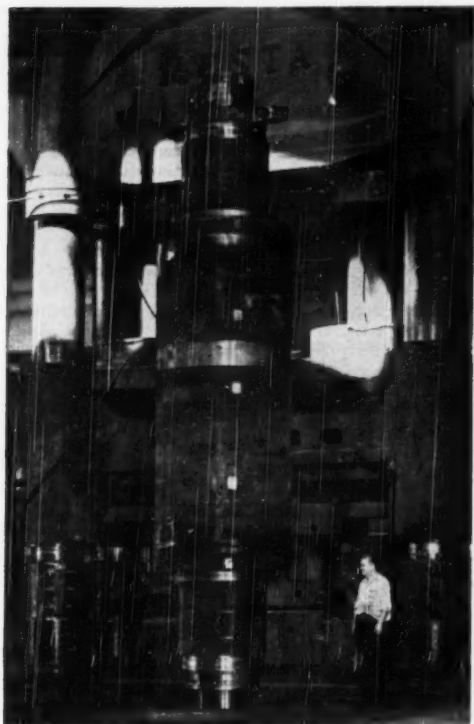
SLEEVE AND ARBOR ASSEMBLY FOR A 160-IN. PLATE MILL
